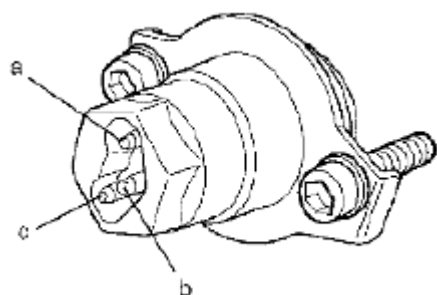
Identifying Engine Block Heater Mounting Bolt
